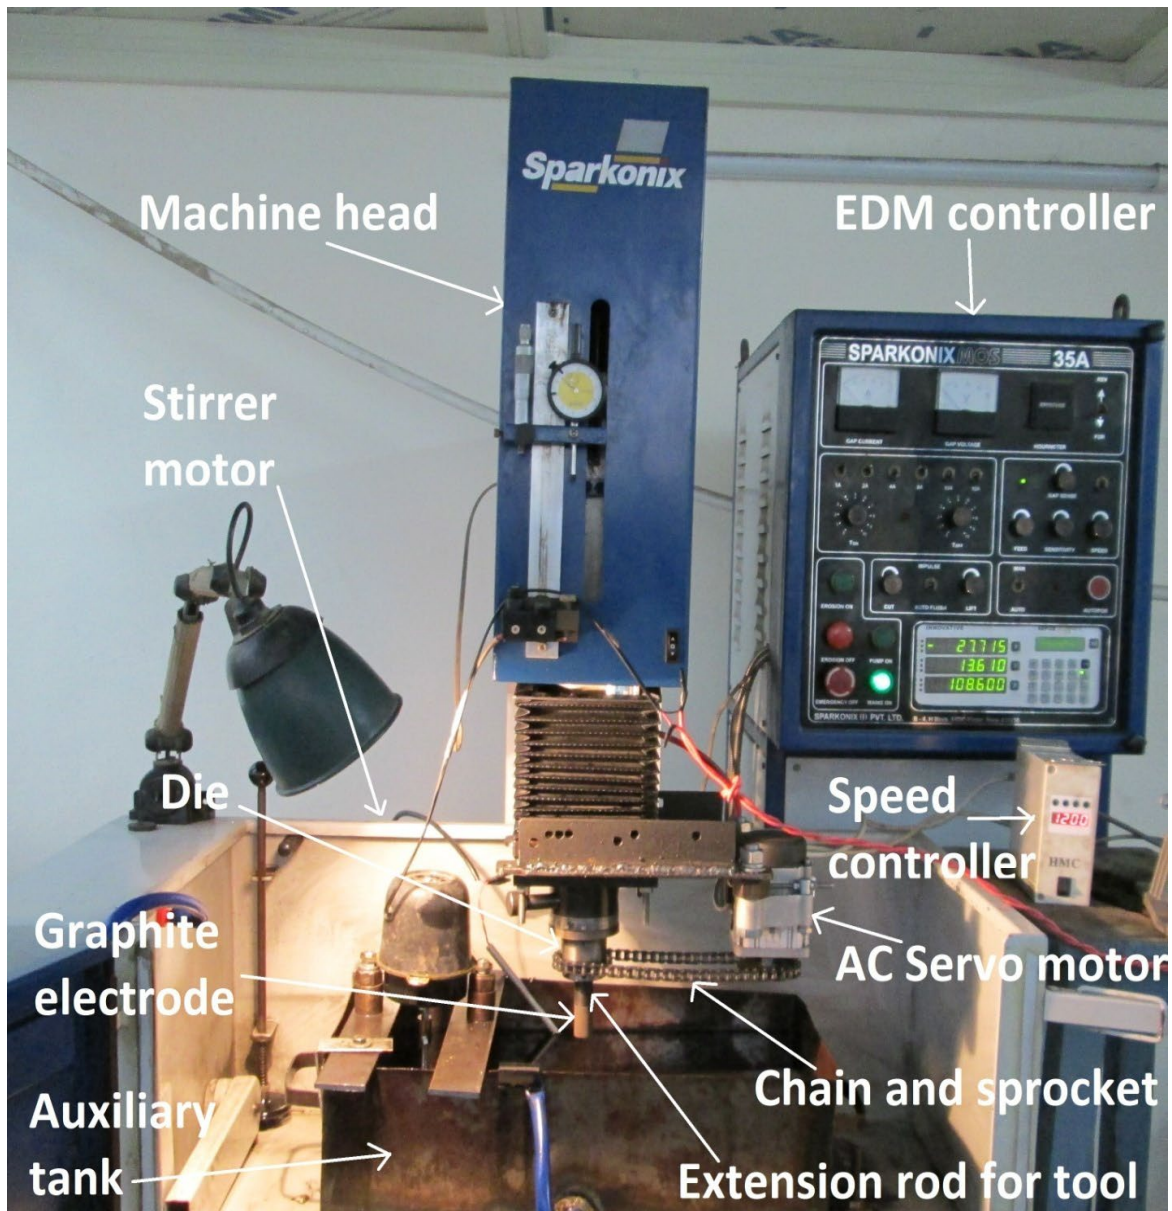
Abrasive mixed rotary tool EDM setup.
